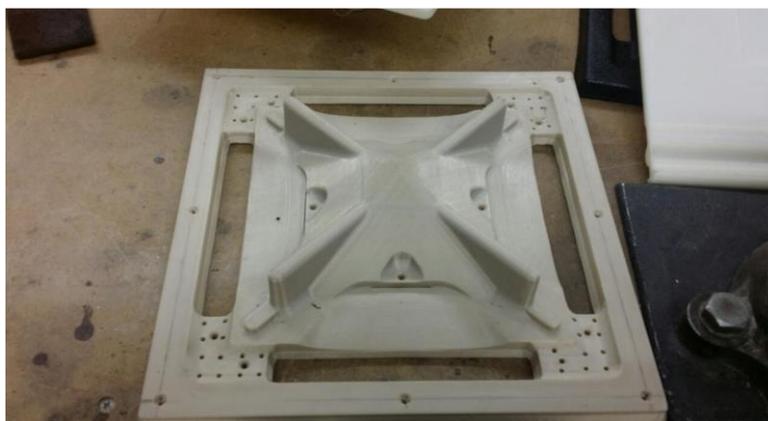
PPFS thermoform tool with suction holes for vacuum.
